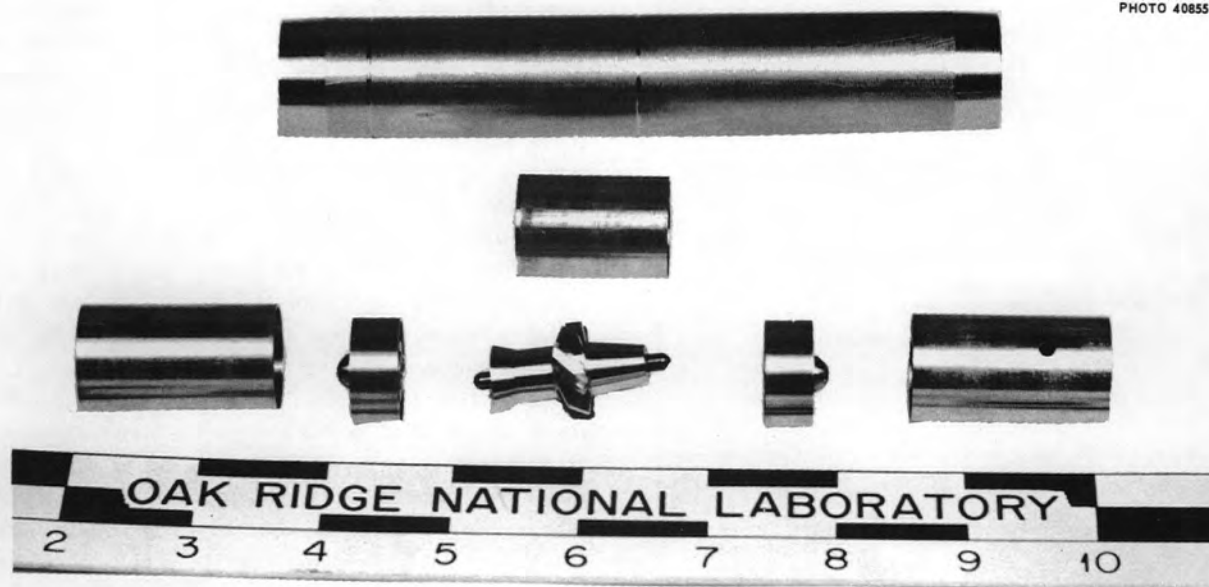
The 1-in. Turbine-Type Magnetic Flowmeter, Exploded View.
